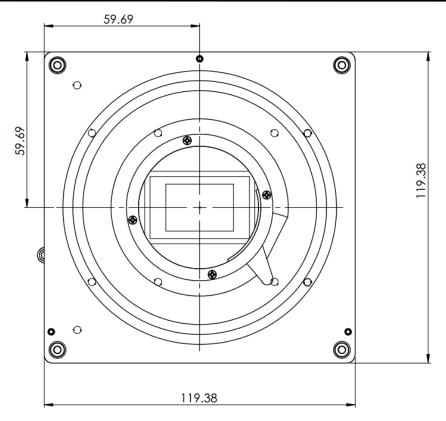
Camera Body with F Mount Lens Mount - Front View (Units in mm)
